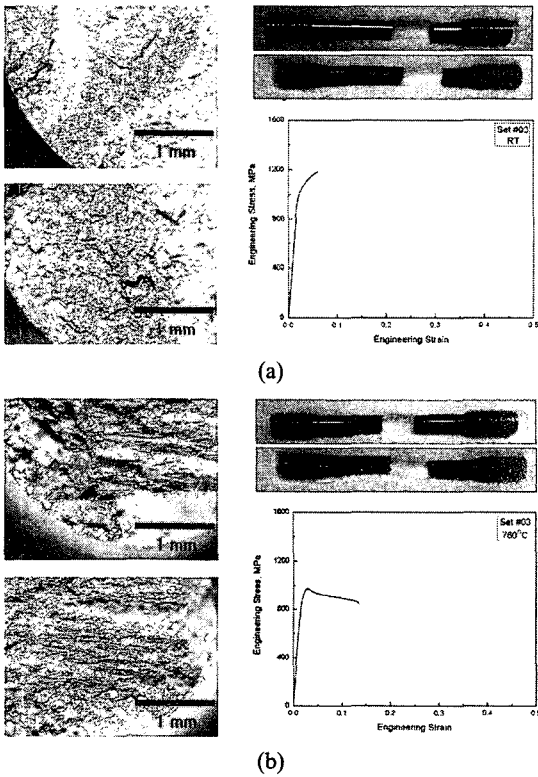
Observation of hiped and heat treated welding specimen
